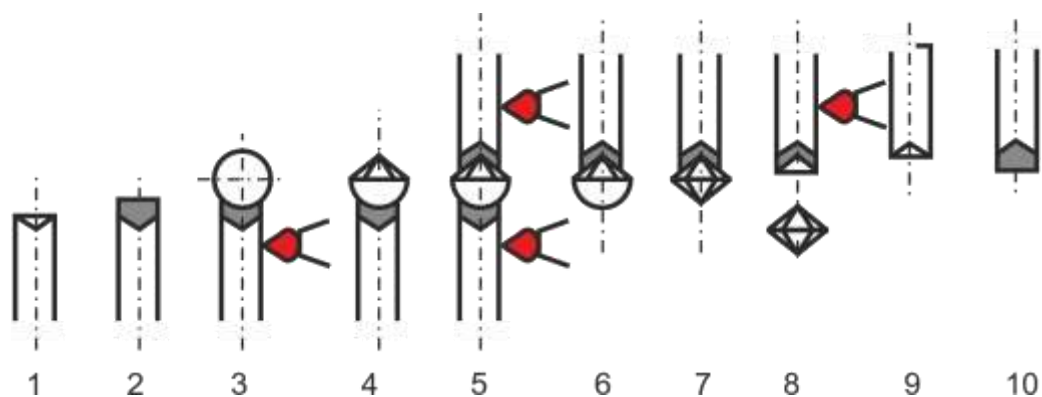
Bonding and re-bonding of ground and polished chatons. 1 - cleaned stick, 2 - applying bonding agent to the stick, 3 - gluing (fixing) of the glass semi-finished product in the form of a ball or in the form of a formed chaton on a rotary presser, 4 - grinding and polishing of the top side of the chaton, 5 - re-bonding, 6 - re-bonded semi-finished product on another apparatus, 7 - grinding and polishing of the underside of the chaton, 8 - bonding-off of the chaton, 9 - cleaning of the stick, 10 - application of the bonding agent, thus preparing the stick for another bonding and re-bonding operation as in position 3 or 5
